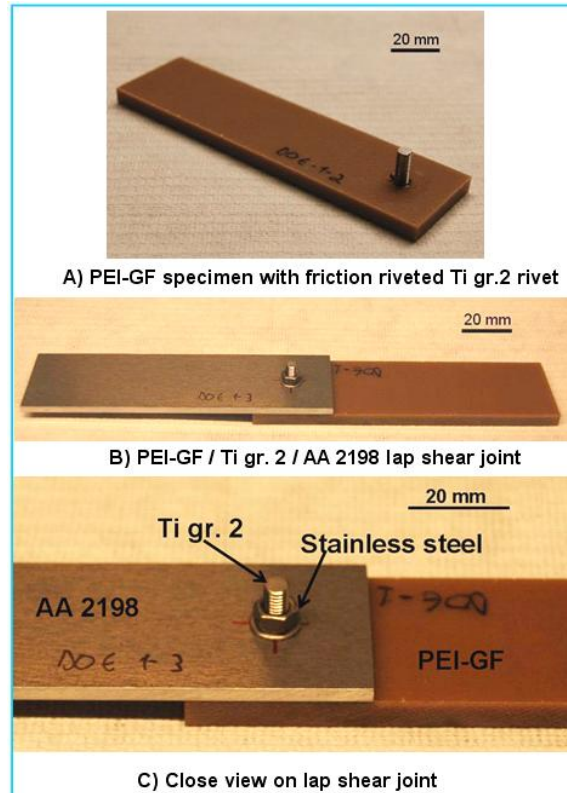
Assembly procedure of the lap shear specimens: A) titanium rivets are inserted in the PEI-GF composite plate; B) the perforated Al-plate is overlapped onto the riveted composite element and finally the washer and nut are added with a torque tool.
